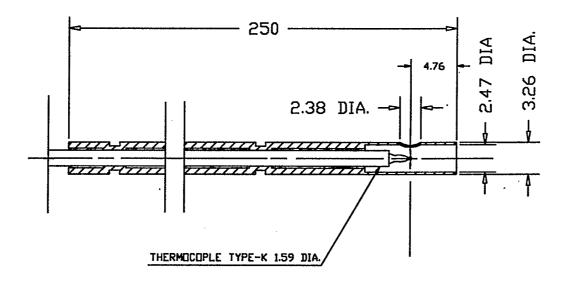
Thermocouple Assembly for Stagnation Temperature Measurement.
